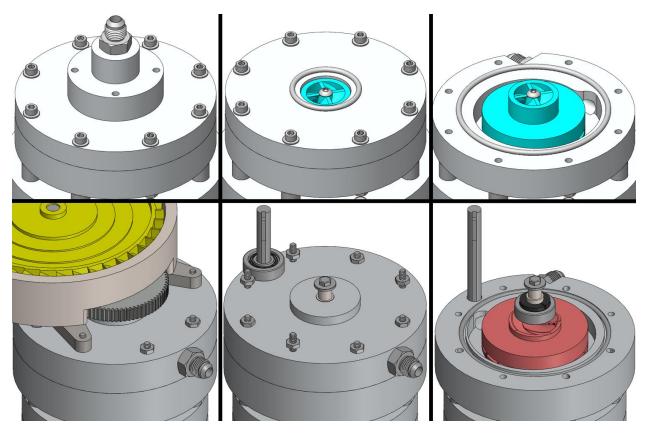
Pump pieces in context of full turbopump assembly. Ox on top, fuel on bottom.
